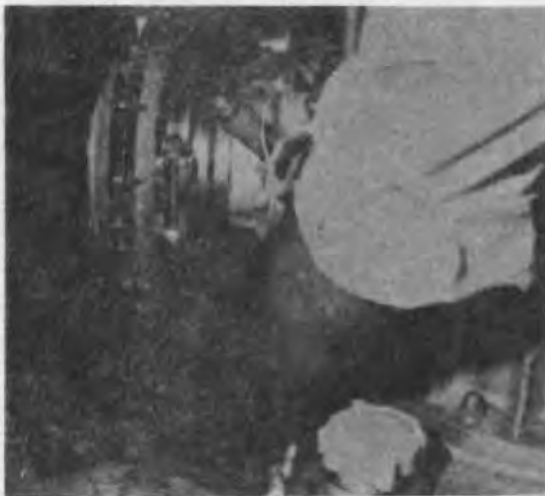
Input drive shaft — 204-040-010 lubrication (Sheet 3 of 4)
